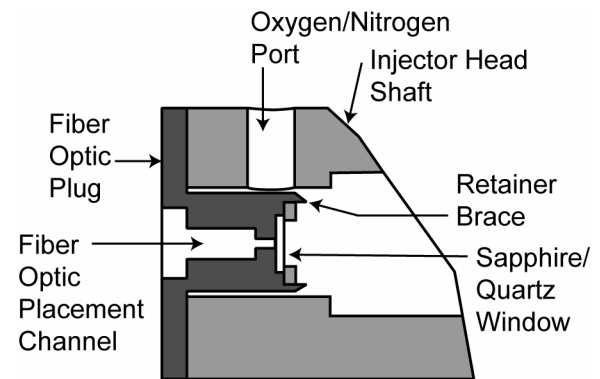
Cross section of injector head shaft (IHS) and fiber optic plug (FOP).
